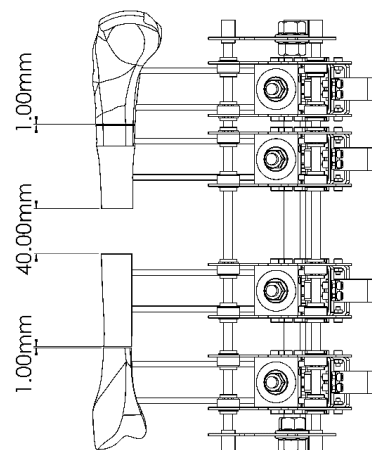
Motorized unilateral external bone fixator modeled in SolidWorks, the SCHANZ, and how the threaded SCHANZ is attached to a fractured bone, part of which has been destroyed.
